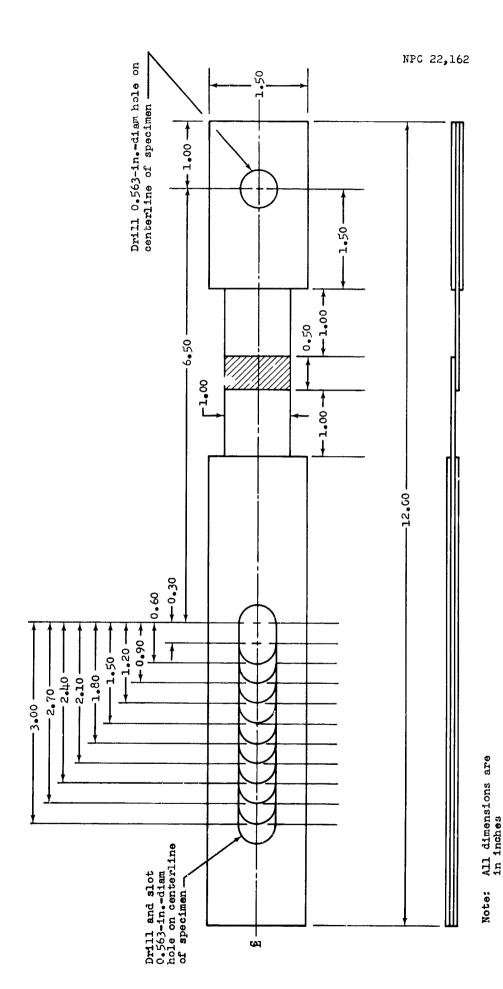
Typical Lap-Shear Adhesive Specimen
